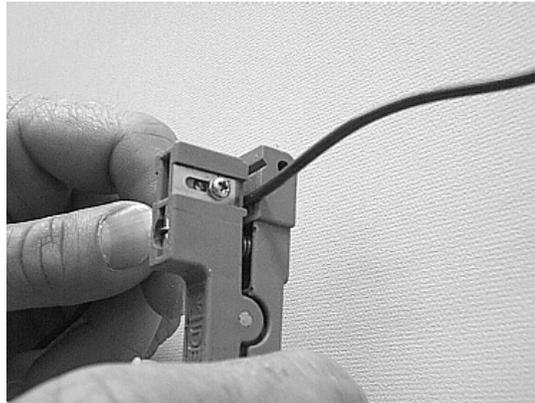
Ring cut the buffer tubes with a buffer tube removal tool.
